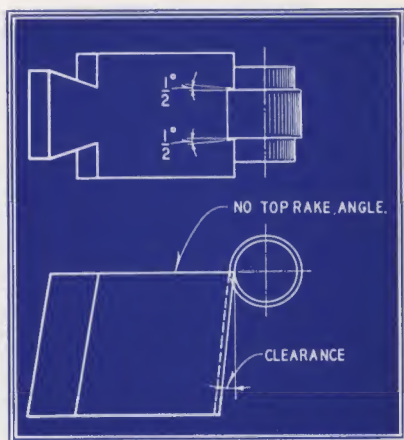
Dovetail form tool for 11S-T3 alloy.
